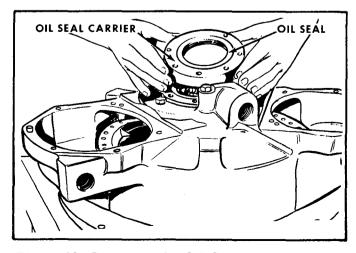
Removing the Oil Seal Carrier from the Guide Wheel Carrier.
